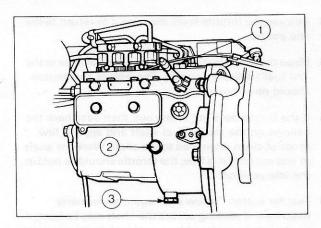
Injection Pump Oil Plugs (Class "A" Close Regulating Governing Only)
